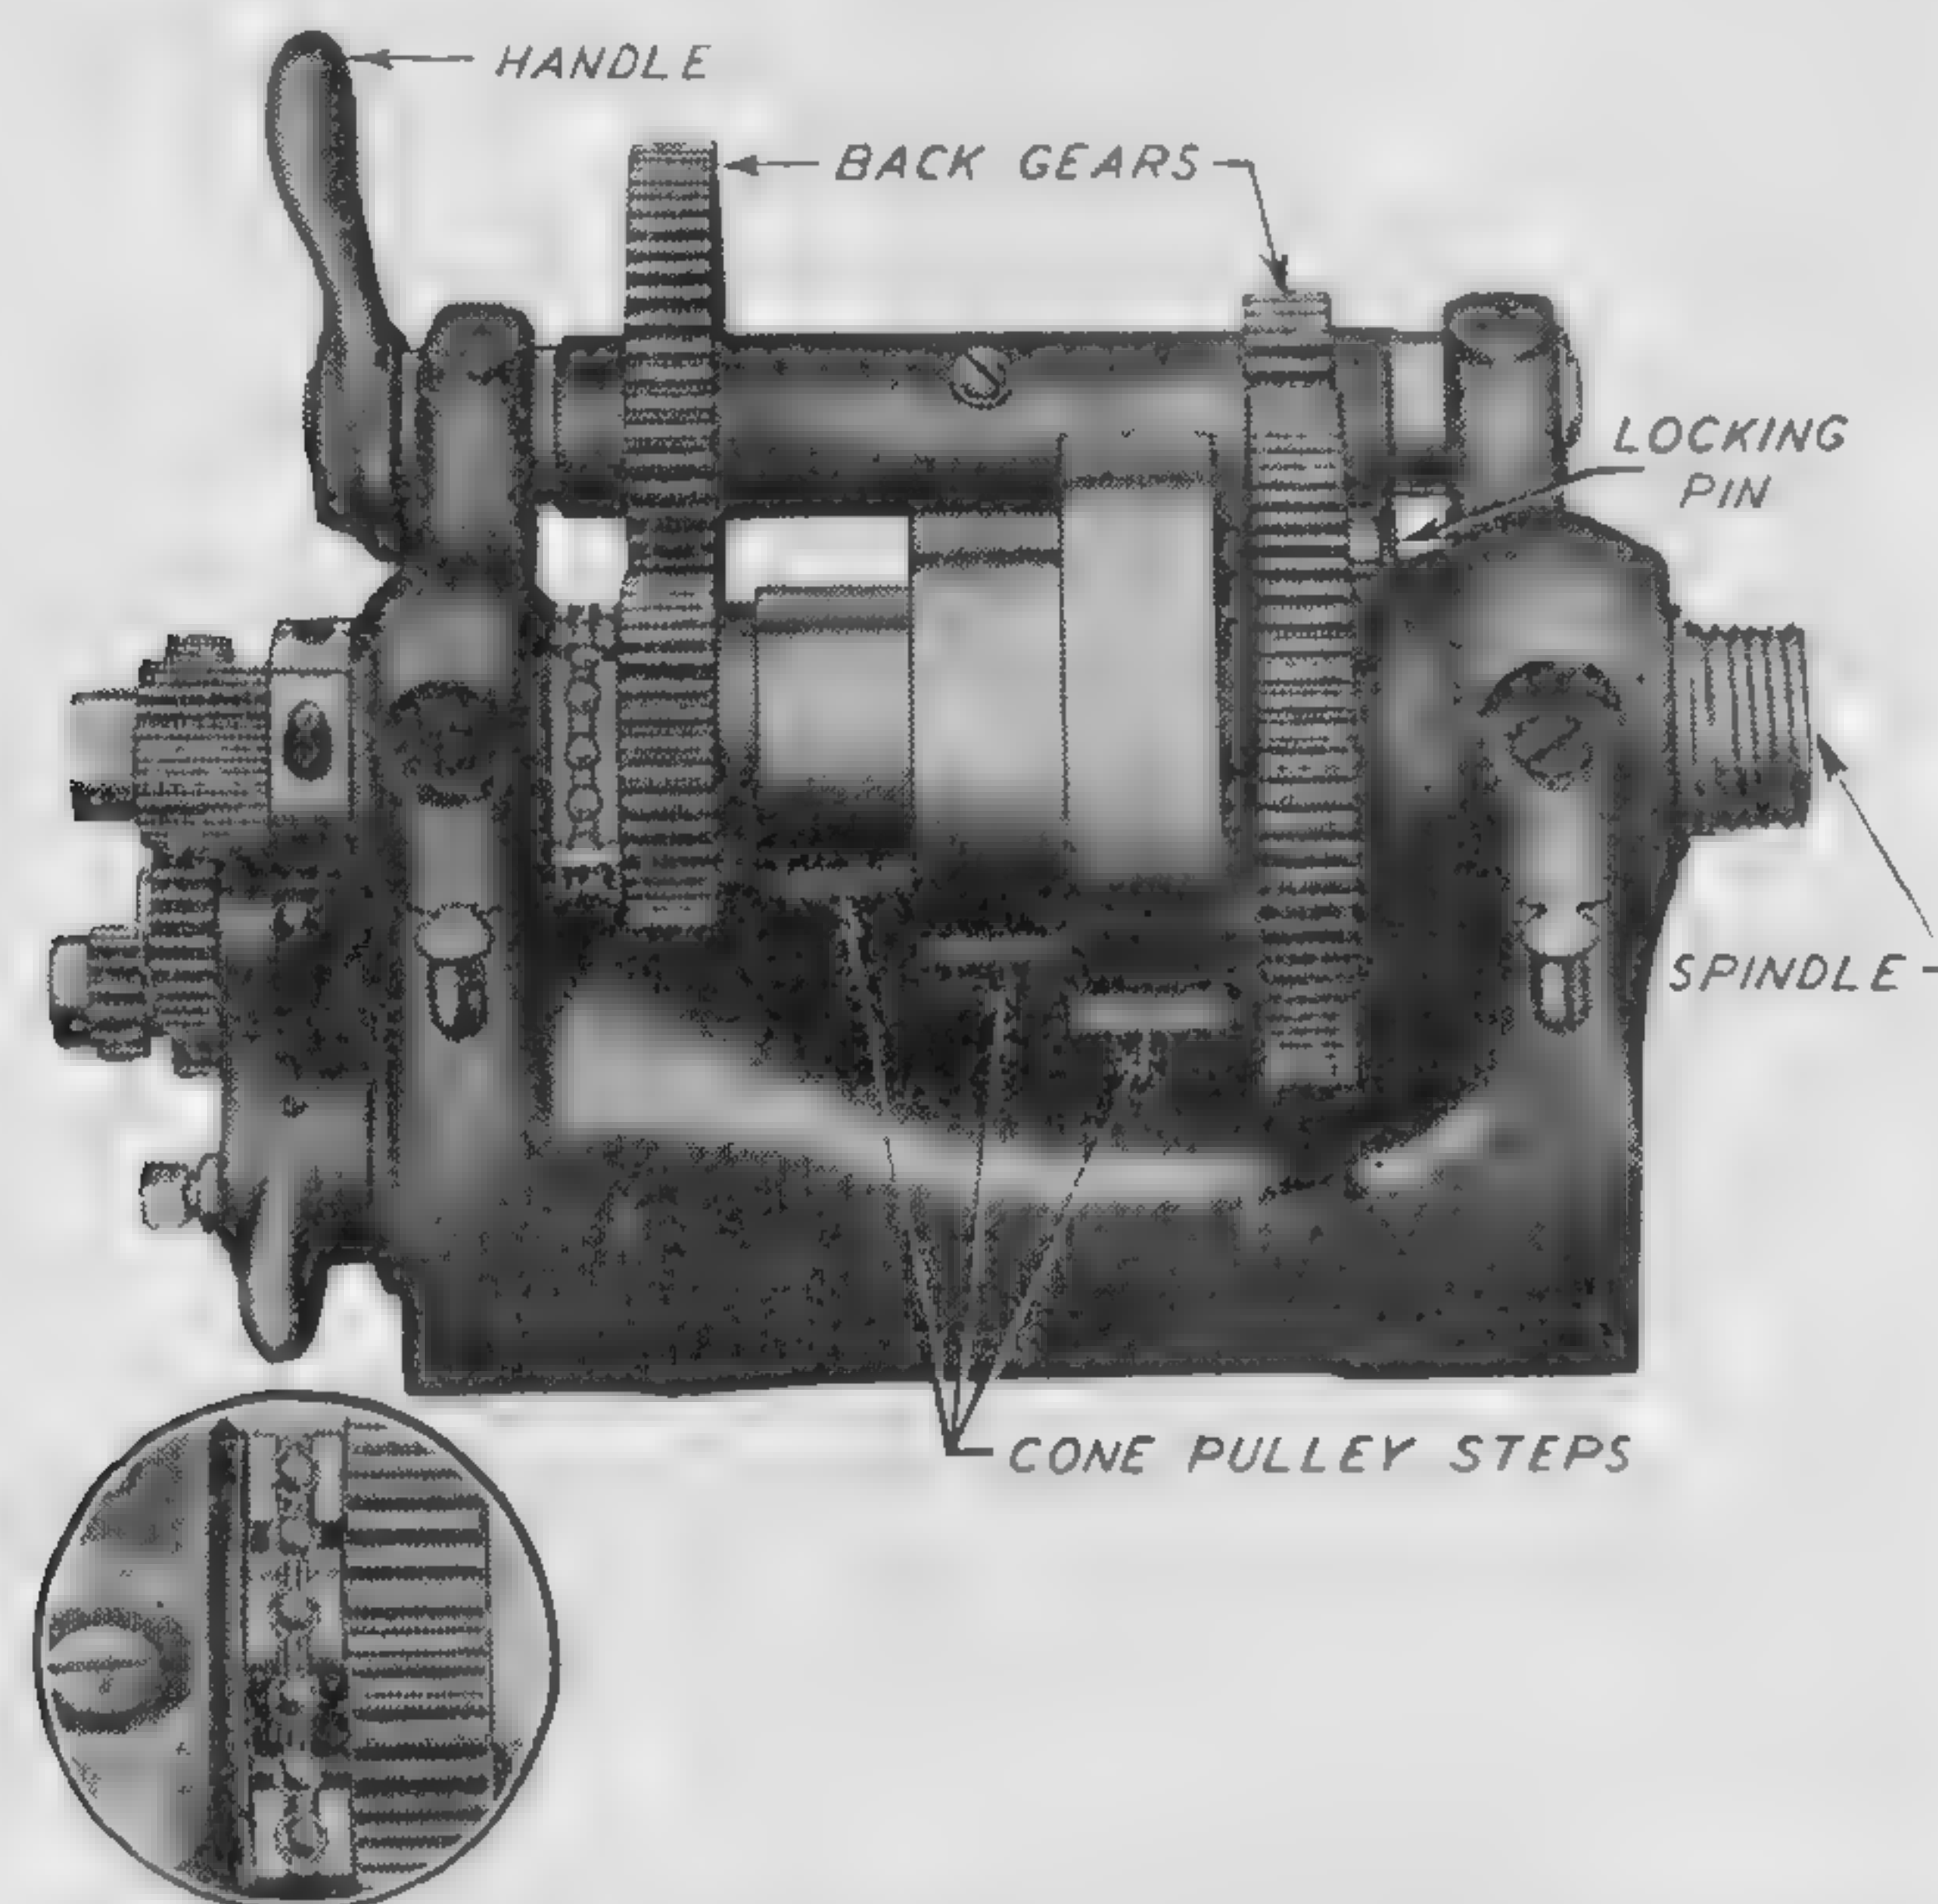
Plan of Lathe Headstock Showing Cone Pulley and Back Gears
